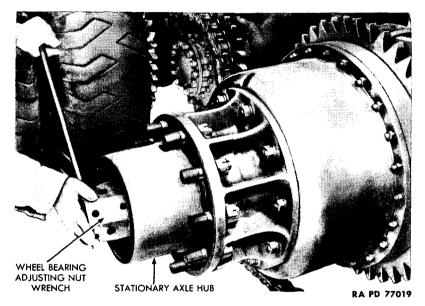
Removal of Rear Wheel Bearing Adjusting Nut
